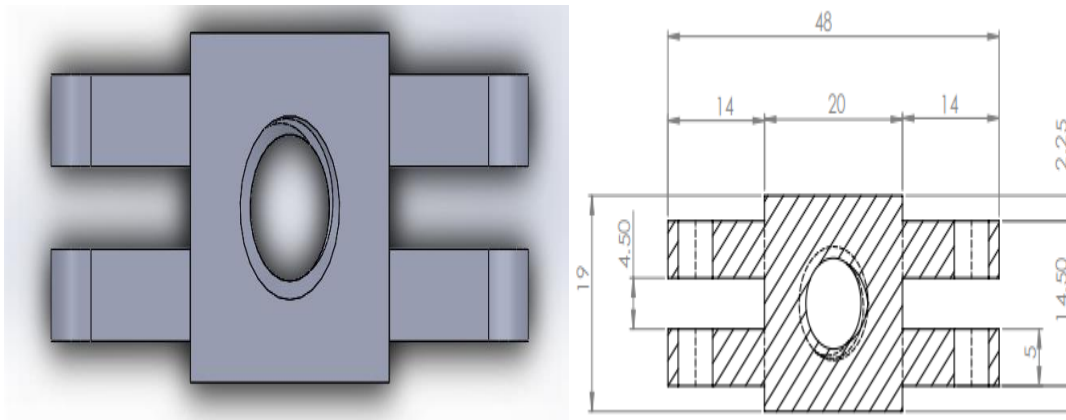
(a) Internal screw thread body 3D part Figure 3.3(b) Internal screw thread body 2D sketch
